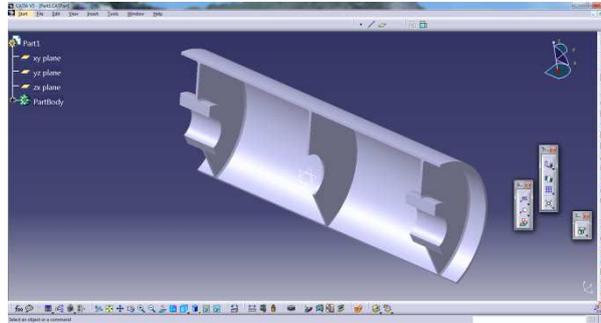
showing the Half Section View Of Existing Conveyor Pulley With T Shaped Hub.
